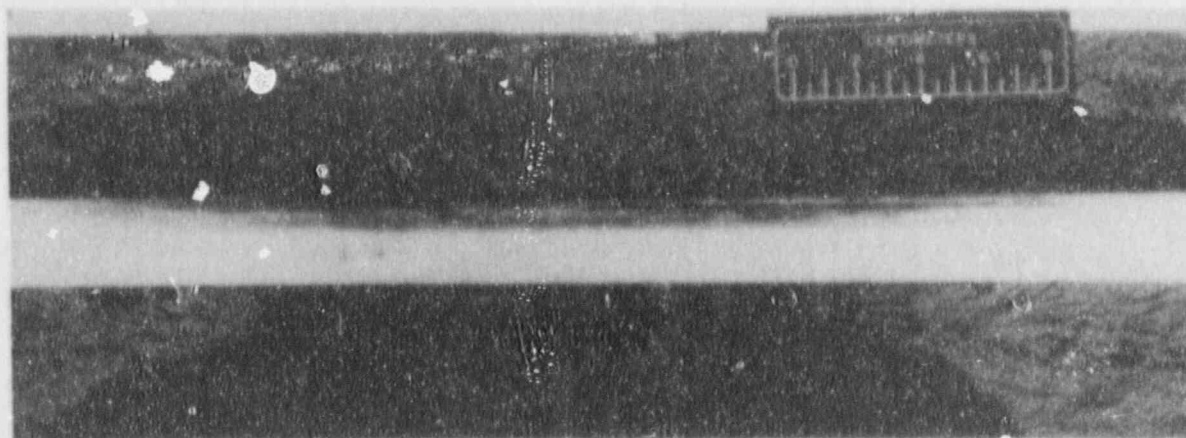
Fracture surfaces of the two broken halves of unclad plate CP-21. The plate ruptured approximately 2.5 h after the start of the hydrogen charging.
